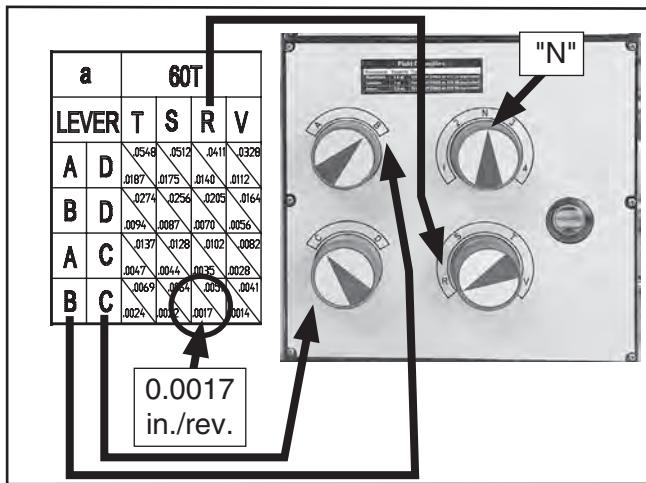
Gearbox dials positioned for 0.0017 in./rev.
